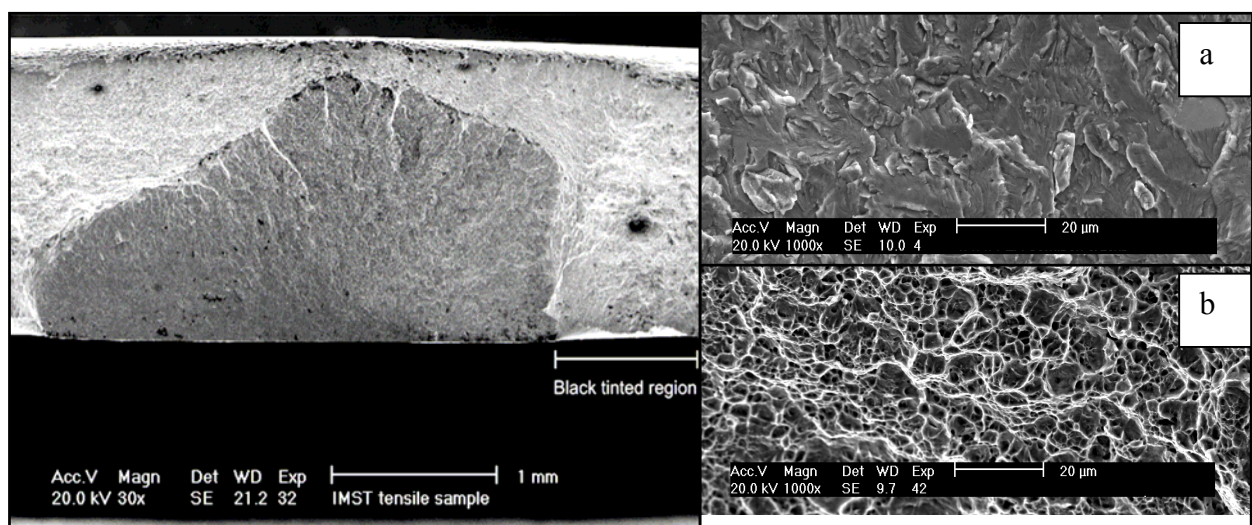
Crack fractography, white crack propagation lines pointing towards crack initiation, a): Cracked surface showing brittle fracture which has propagated trans-granularly characterizing hydrogen embrittlement b) Portion of the enforced fracture surface of a typical ductile fracture mode
